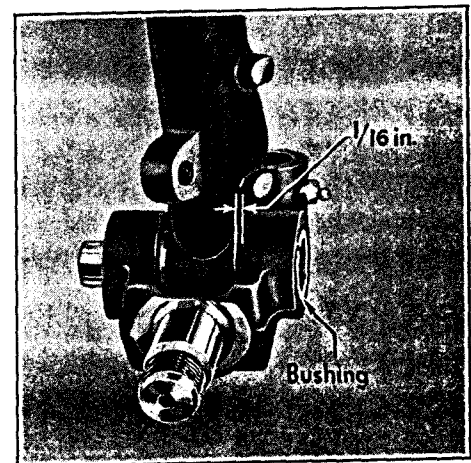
With the taper pin inserted loosely, the bushings should be adjusted to provide $\frac{1}{16}$ in. clearance between the boss on the steering knuckle support and the inner face of the front half of the yoke.
